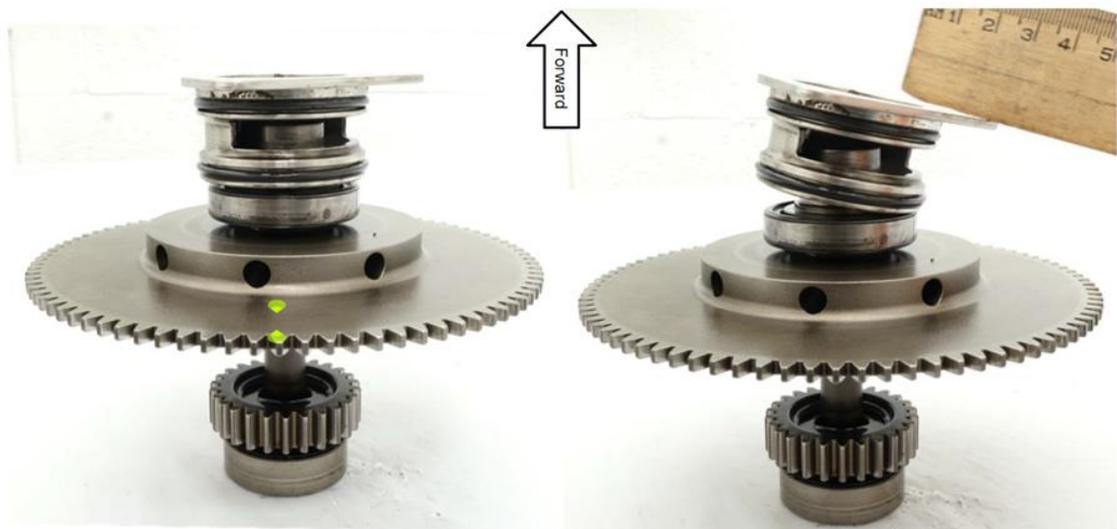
Re-assembled seal and gearshaft demonstrating the amount of looseness between the seal and shaft.
